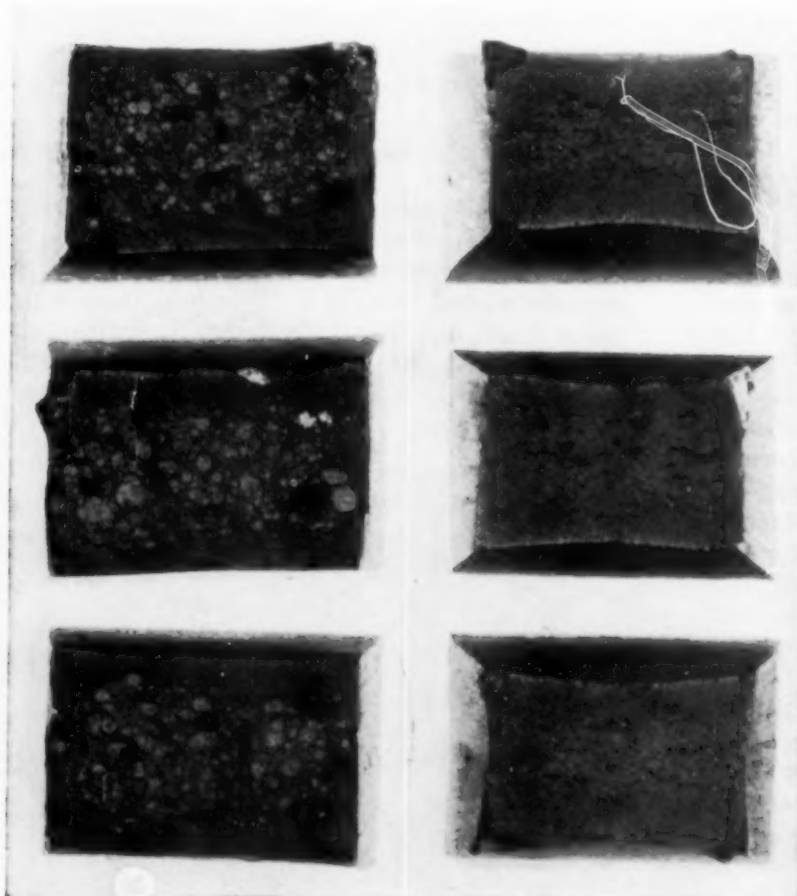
Tensile Fractures From Plate 2 (Slightly Enlarged). At left is fracture appearance of specimens broken 5 days after plate was rolled; at right 32 days after rolling
